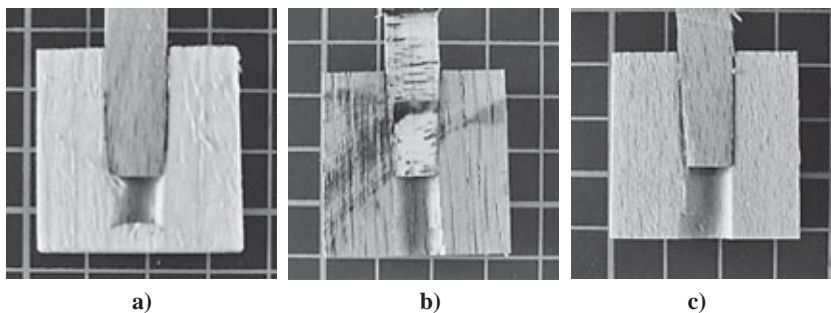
Cross-section of the dowel welded parallel to the fibre orientation for: a) spruce; b) oak; c) beech
